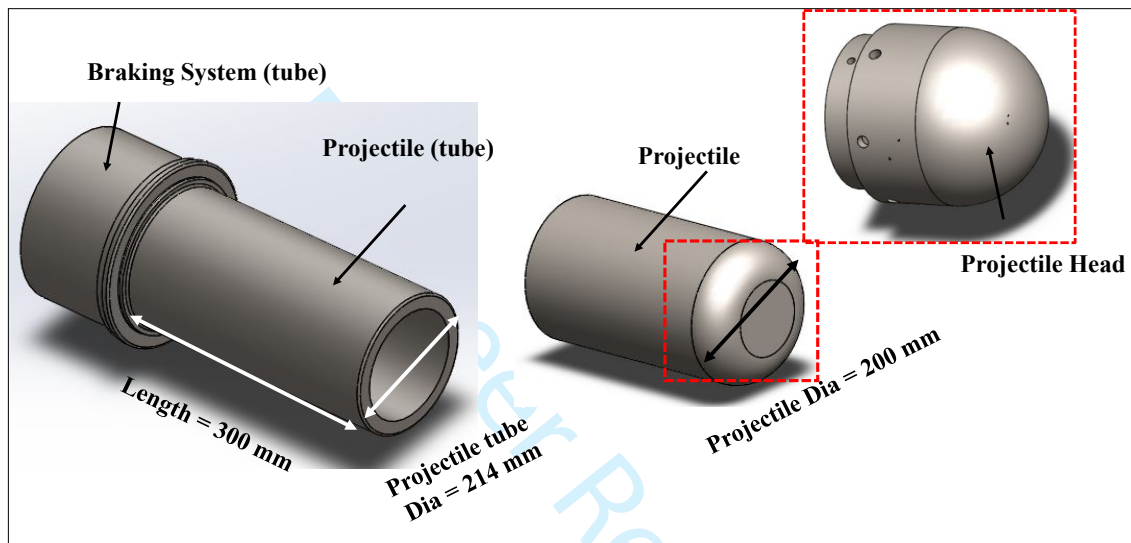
The projectile with elliptical nose fitted inside the impact testing machine
